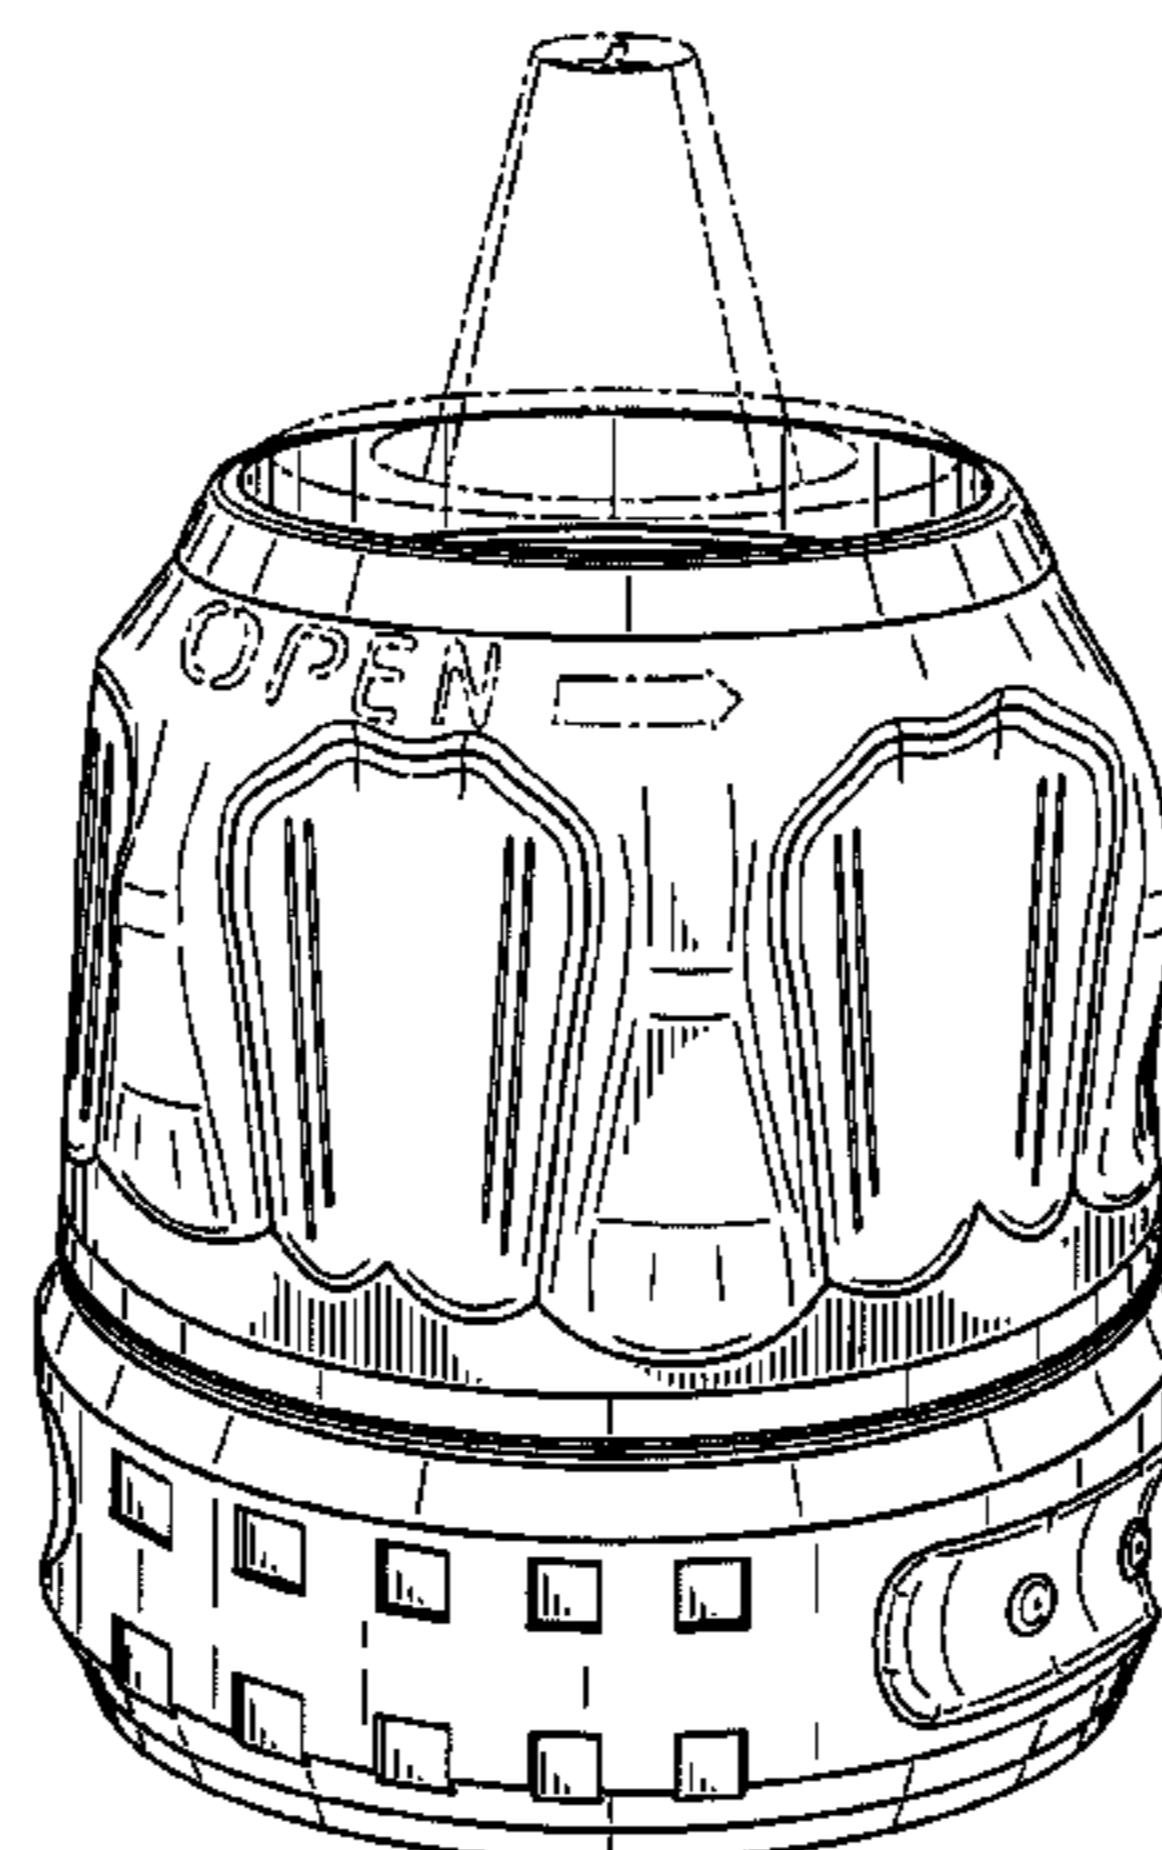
is a right side view of the drill chuck shown in FIG. 8;
